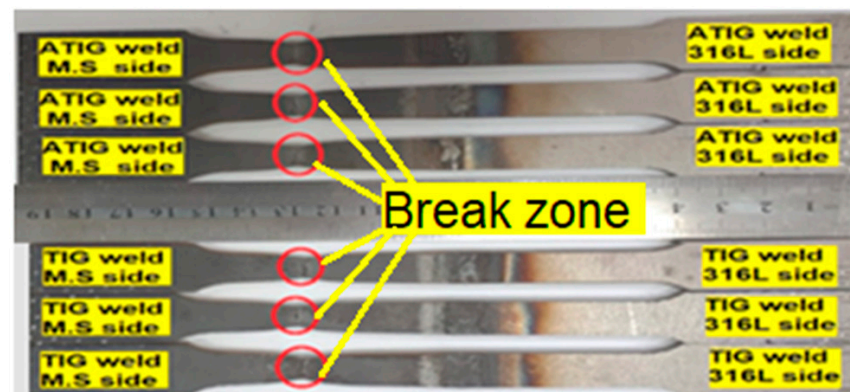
Fracture zones for TIG and ATIG dissimilar welds in the tensile test.
